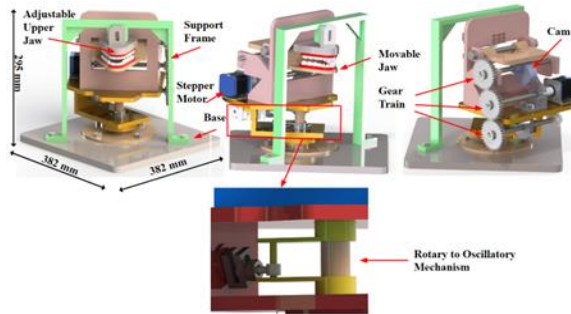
Basic Static CAD model of single motor Masticatory Robot with Gear Train and Cam Shaft Mechanism
